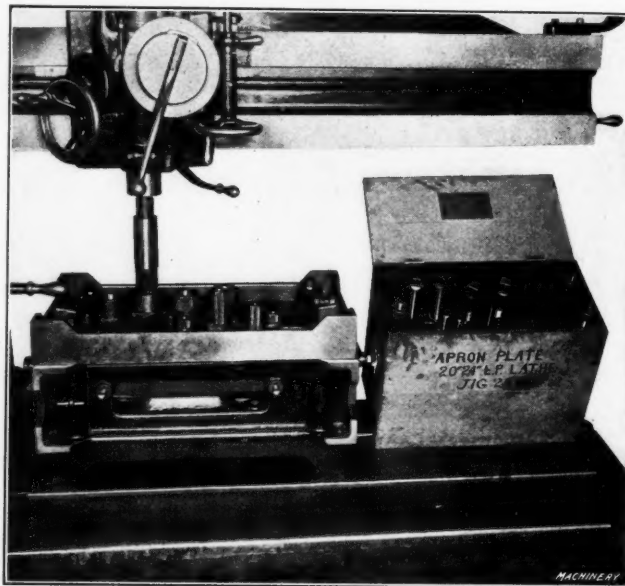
Tool Equipment for Drilling and Boring Lathe Aprons
